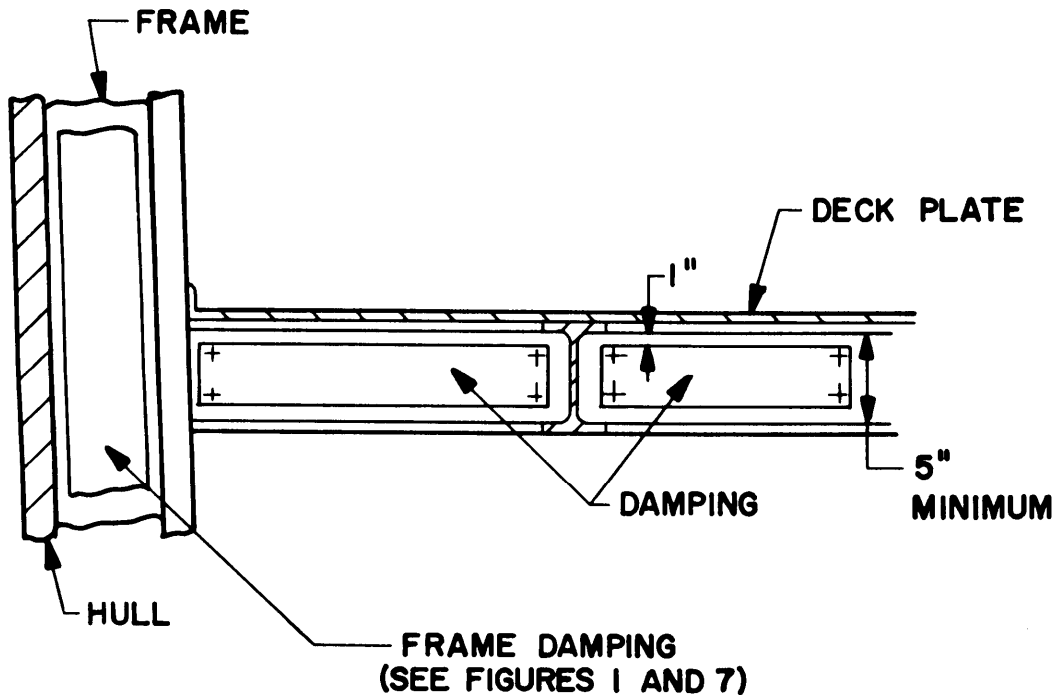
Typical installation of constrained (MIL-P-23653) tiles on thwartship girder.
